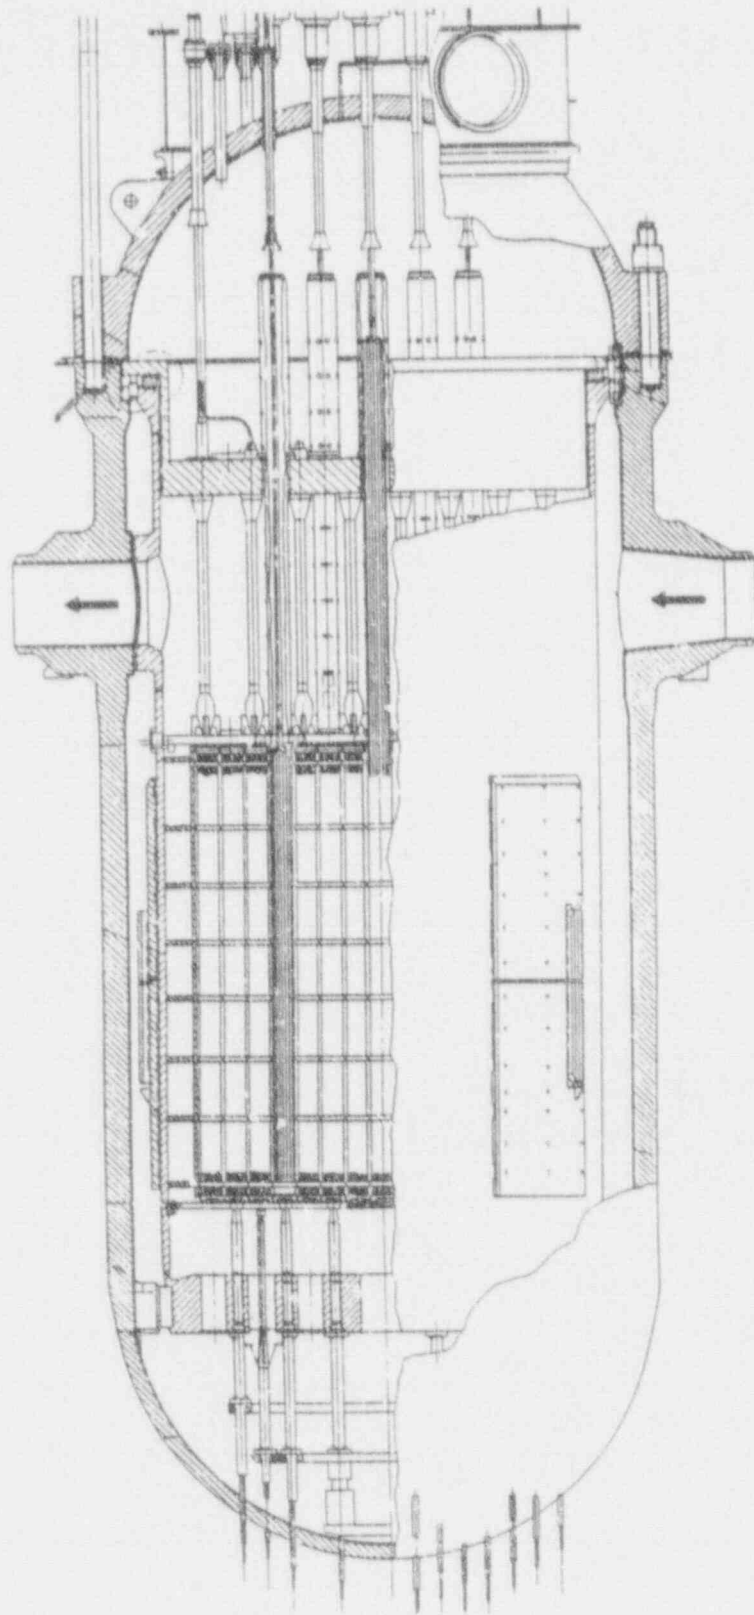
Reactor Vessel Lower Internals Assembly
